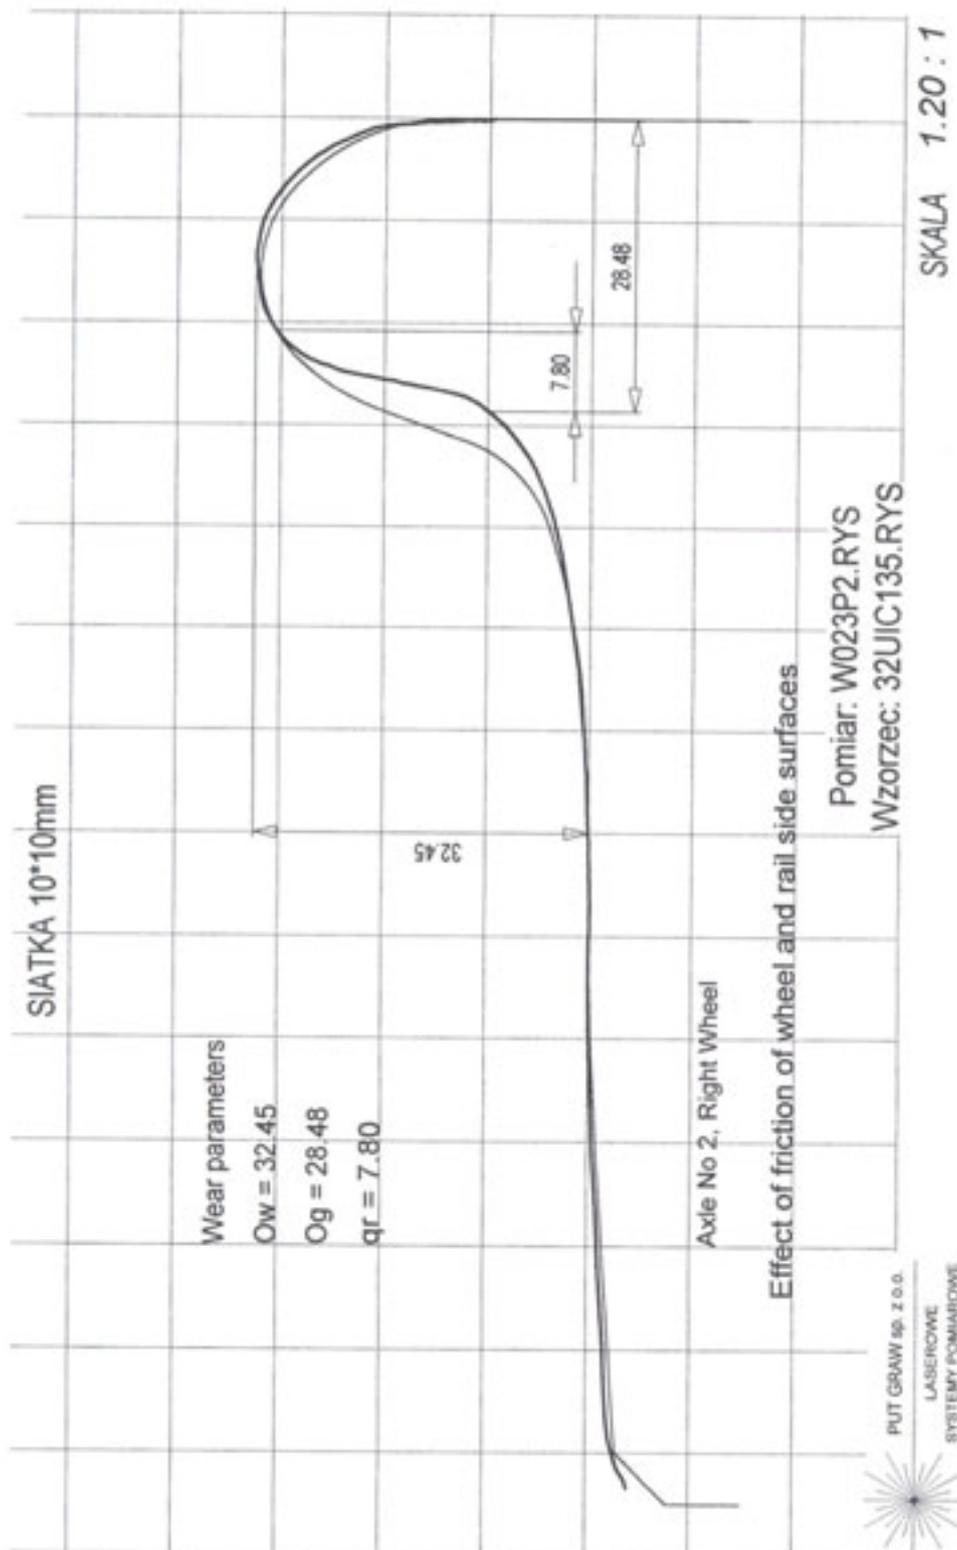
Worn out wheel running surface profile; dimensions were added in user selected locations.
